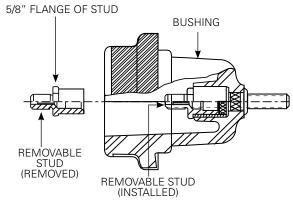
Removable stud bushing well shown with the removable stud both installed and removed.
